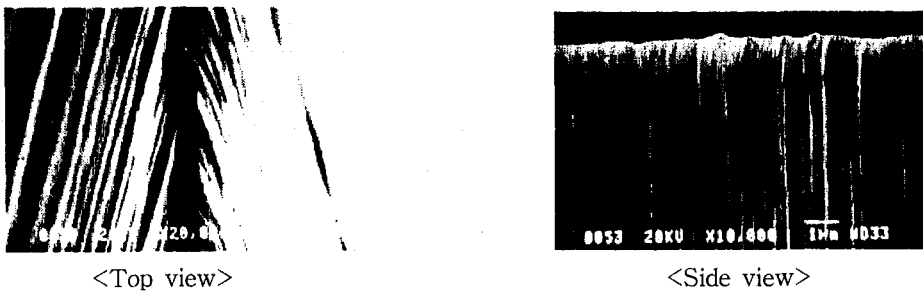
SEM view of the knife edge generated by tilted-head spindle grinding method
